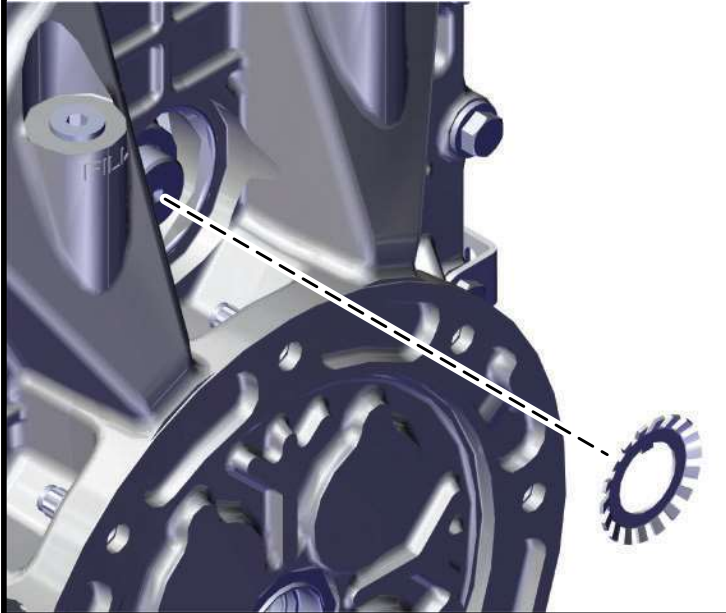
Gearbox Removal and Replacement - 2 of 3
